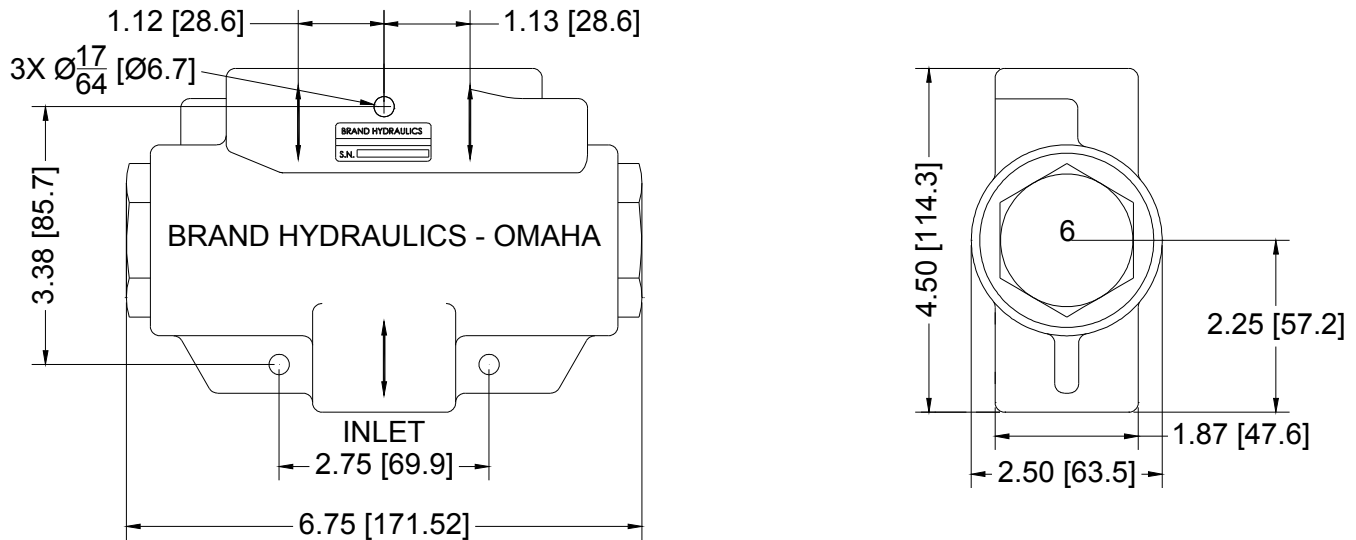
Dimensional data for BG406-16SAE valve in inches & [millimeters]
